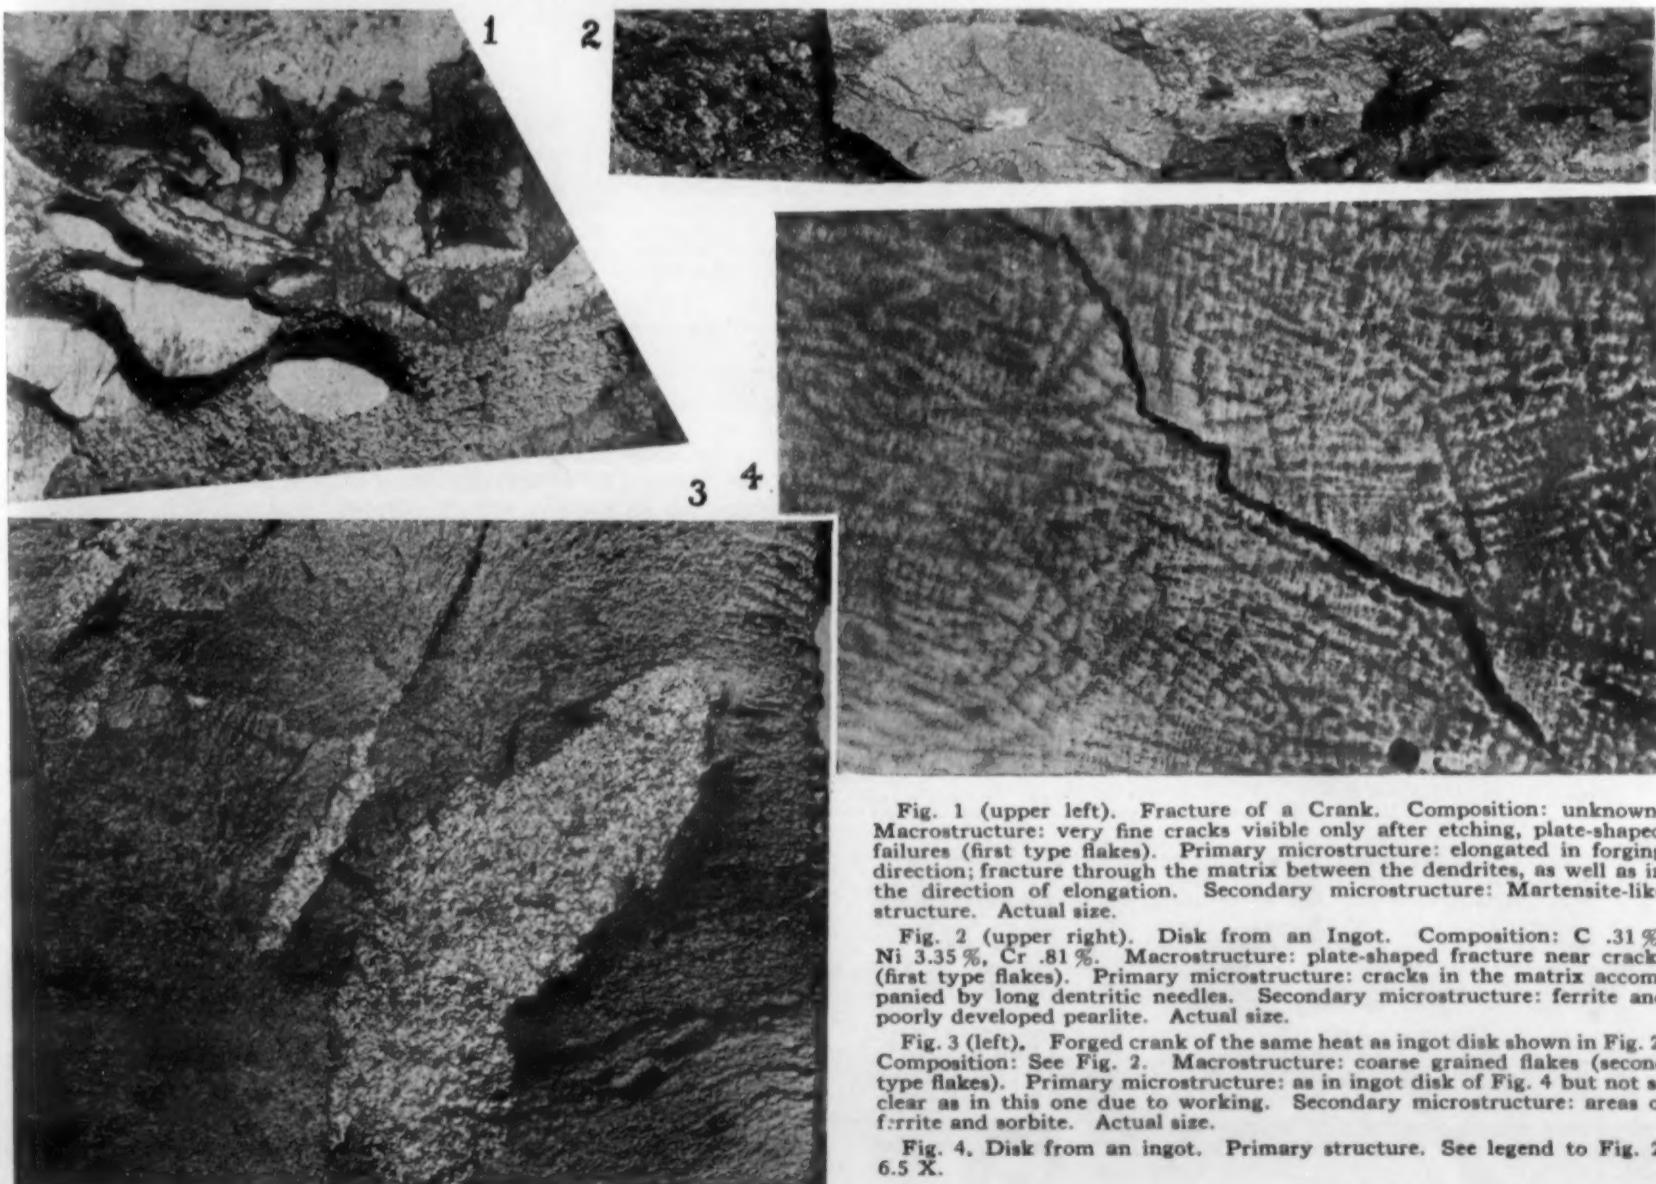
(upper left). Fracture of a Crank. Composition: unknown. Macrostructure: very fine cracks visible only after etching, plate-shaped failures (first type flakes). Primary microstructure: elongated in forging direction; fracture through the matrix between the dendrites, as well as in the direction of elongation. Secondary microstructure: Martensite-like structure. Actual size.
